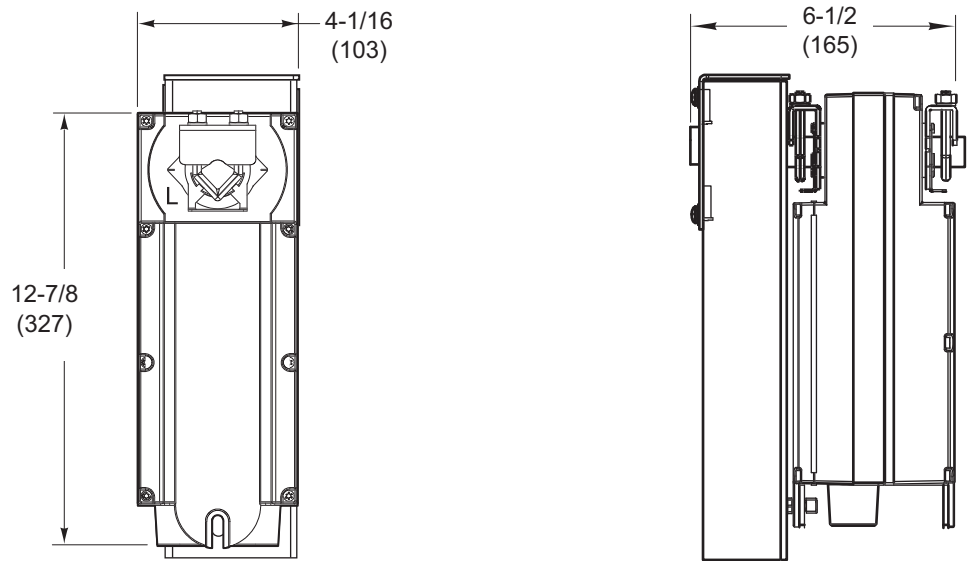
Mx40-717x-230 Actuator/Linkage Assembly
